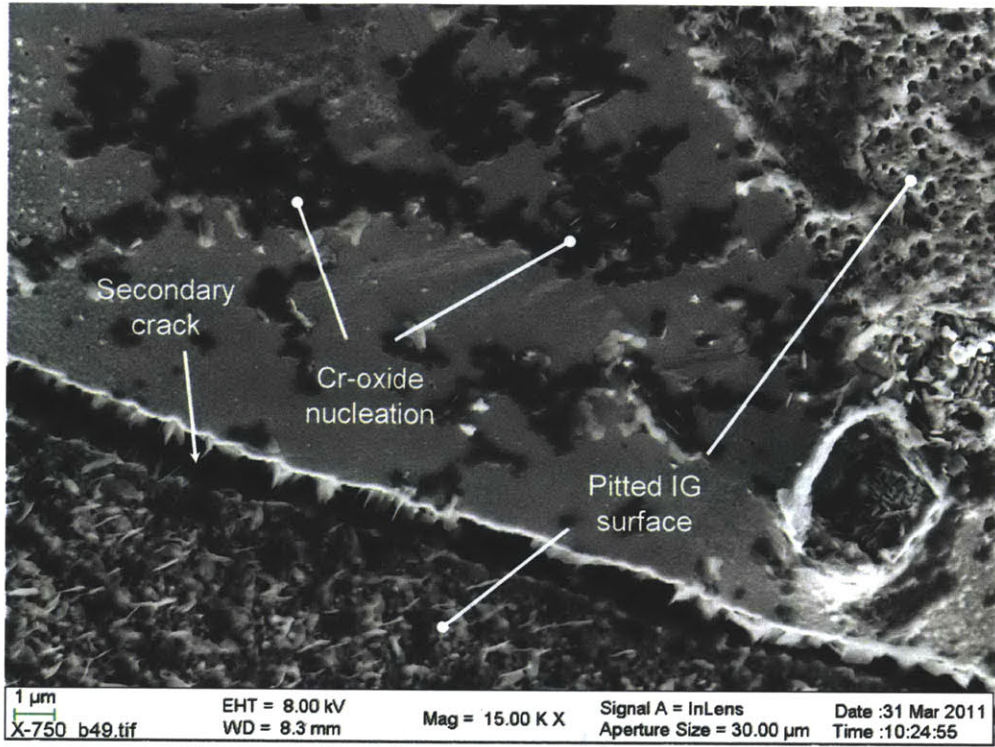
Smooth and pitted SCC fracture surfaces
